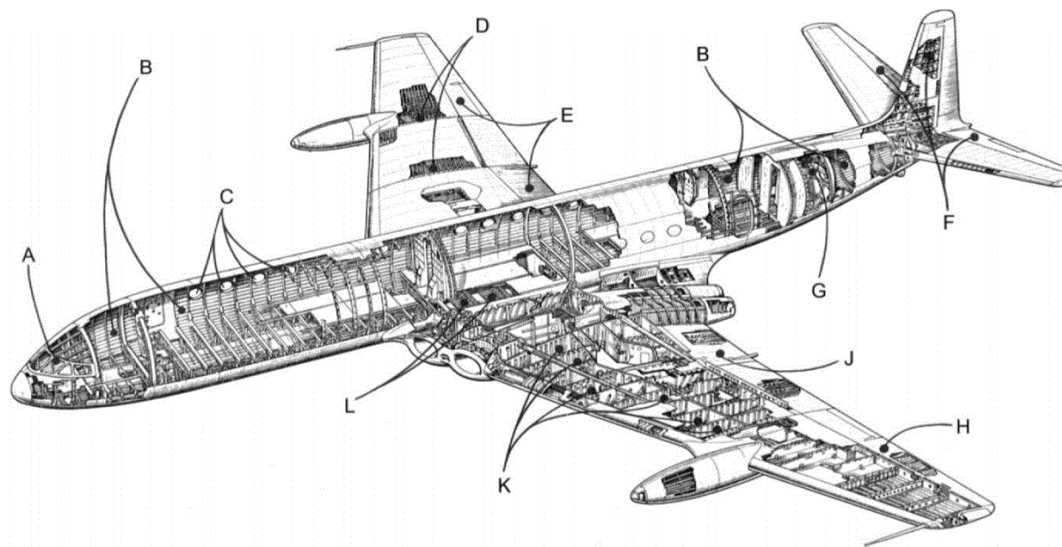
Diagrammatic view of the de Havilland Comet and where structural adhesives used, (A) Canopy structure, (B) Longitudinal stringers of fuselage (C) Local doublers and reinforcements around windows (D,E,H,J,K) Spanwise stringers, ailerons and flap structures, vertical stiffener flanges in wings (F) Wall stiffeners in tail (G) Sealing in pressure dome (L) all stiffeners in pressure floor [1]
